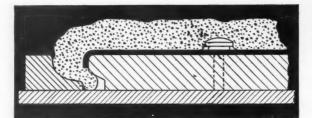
Illustration of use of undercut dies to form narrow flanges having large radii. The bearer block is required to concentrate the pressure.
